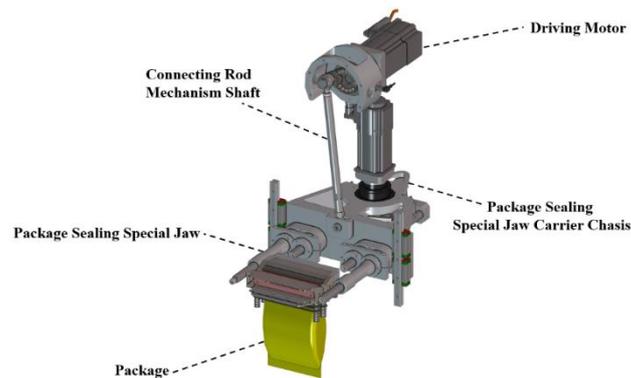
Illustration Of Packaging Machine Package Sealing Mechatronic System Components
